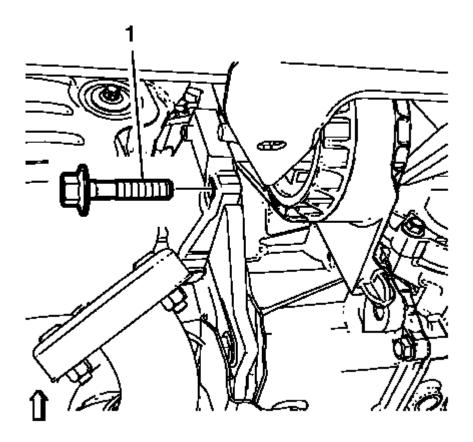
Supporting Fuel Injector Courtesy of GENERAL MOTORS COMPANY
